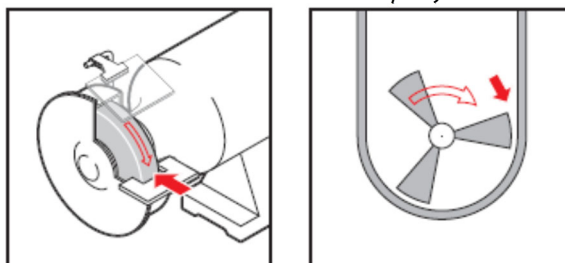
Examples of entanglement hazards between rotating and fixed parts
